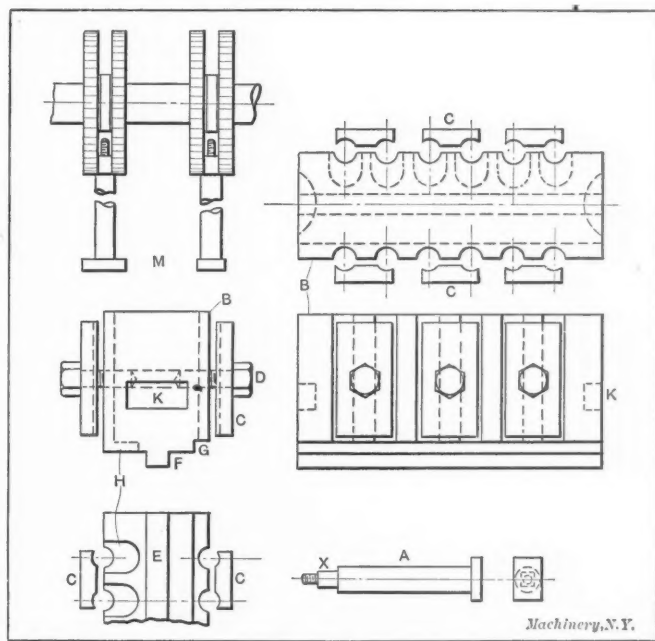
Fixture for Milling Square X on Bolts A in Correct Relation with Rectangular Heads
